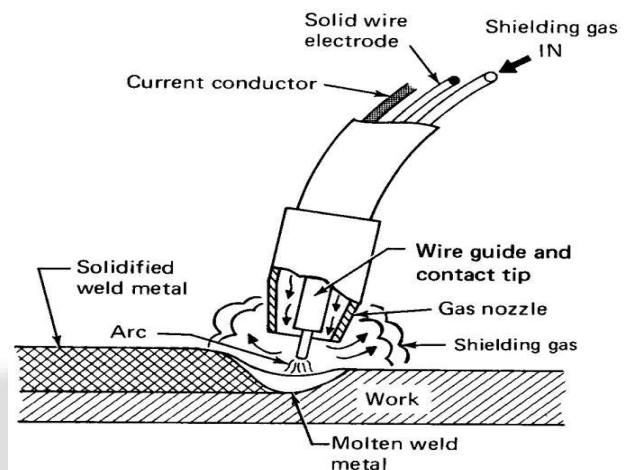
Schematic diagram of MIG Welding Process
